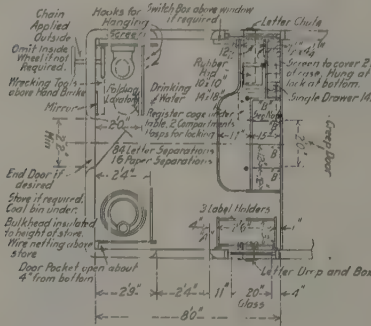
Floor Plan of 8 ft. Mail Apartment.
